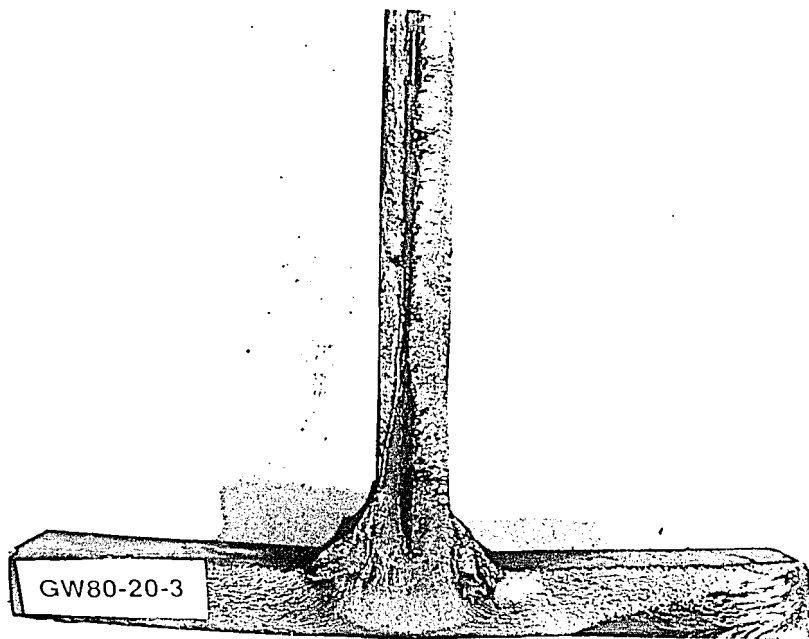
Typical Incomplete Penetration of Two-sided Groove Weld in 9.5mm Thick Web.
